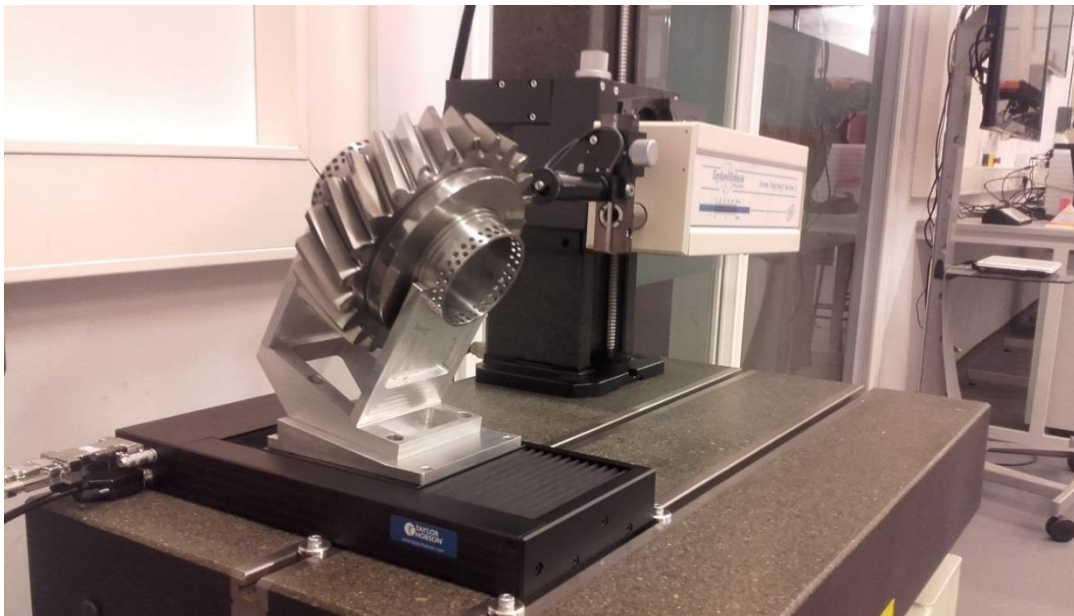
Photograph of gear mounted in measuring jig on profilometer y-stage.
